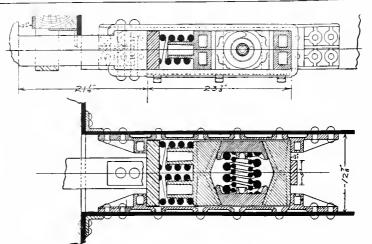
Application of Dayton Twin Spring Draft Gear to Car with Steel Underframe. Dayton Malleable Iron Co.
